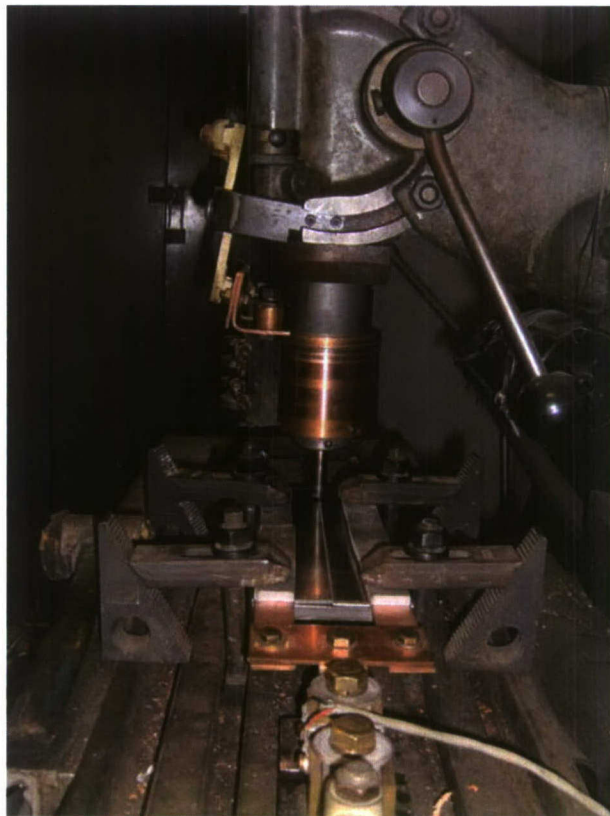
Mill Table with Standard Resistor for Current Measurement (foreground) and Insulating Artificial Mica Plates Beneath Work Piece and Clamps.
